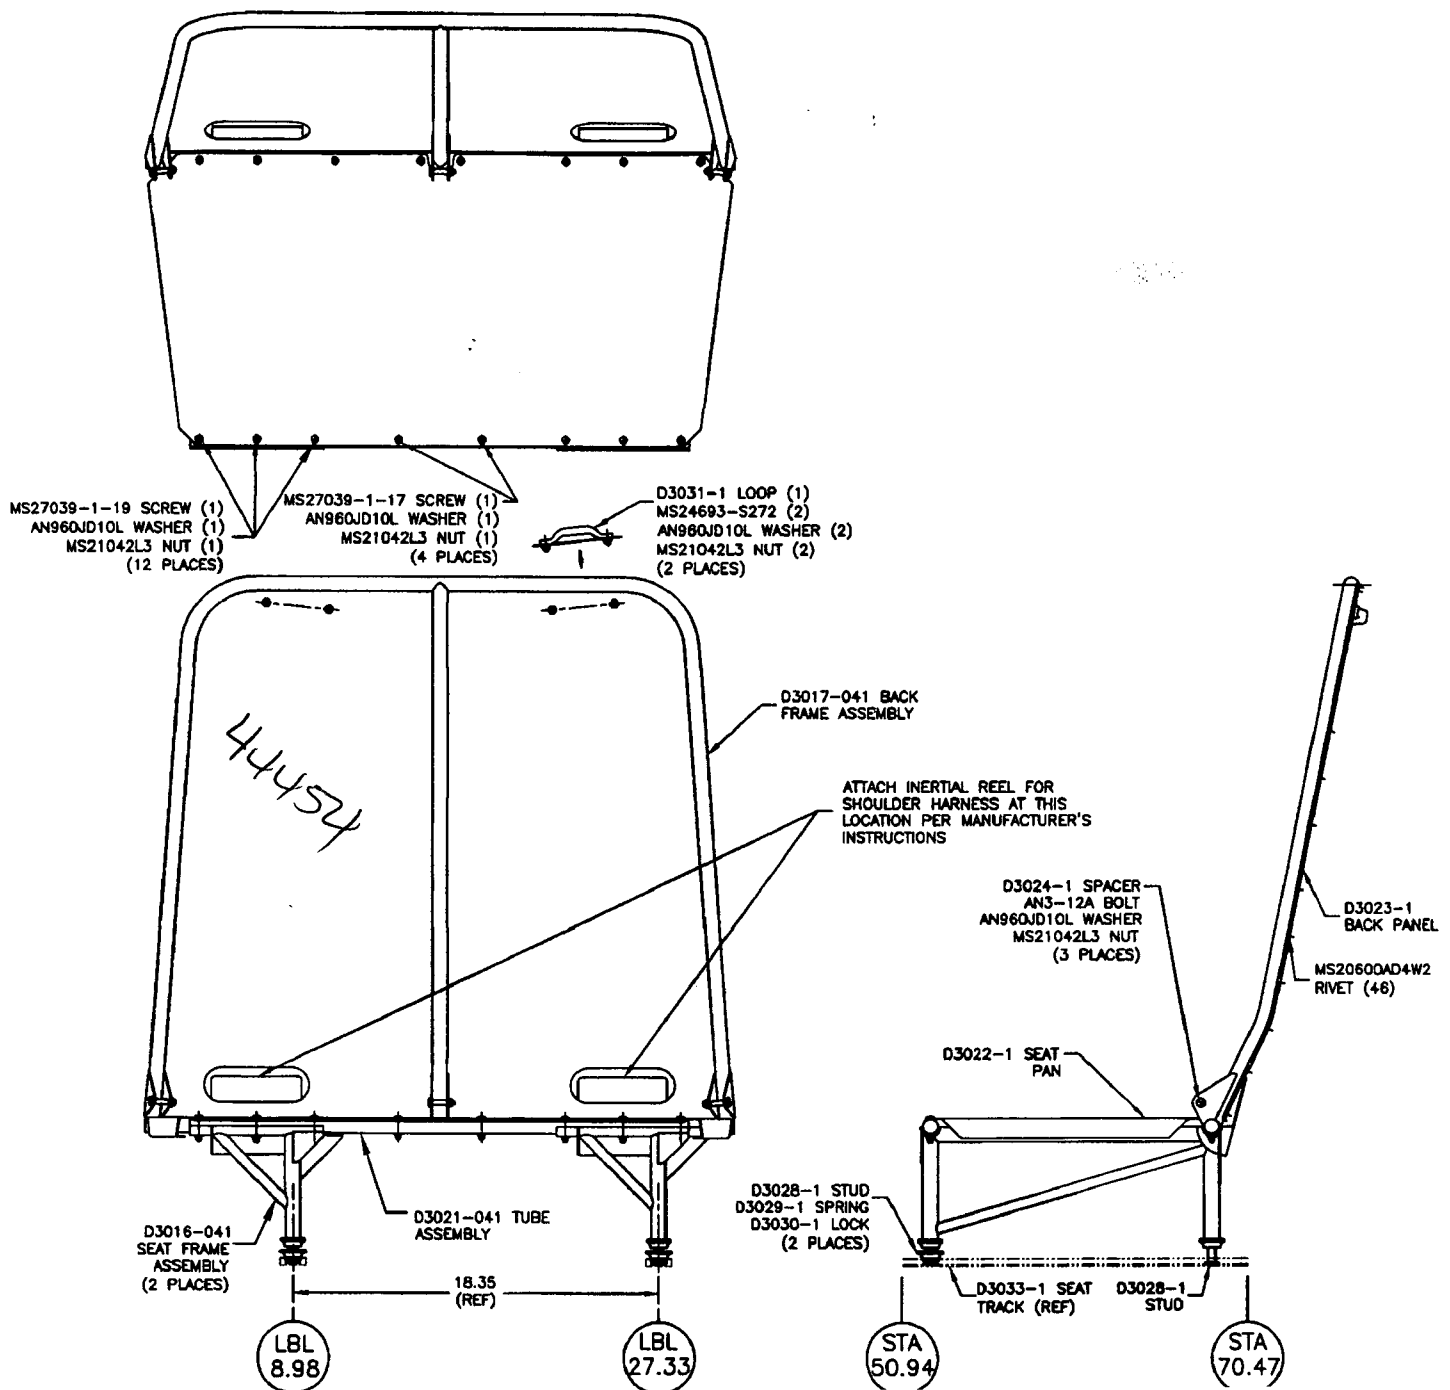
Installation of D350-689-041 Dual High Back Seat Assembly
